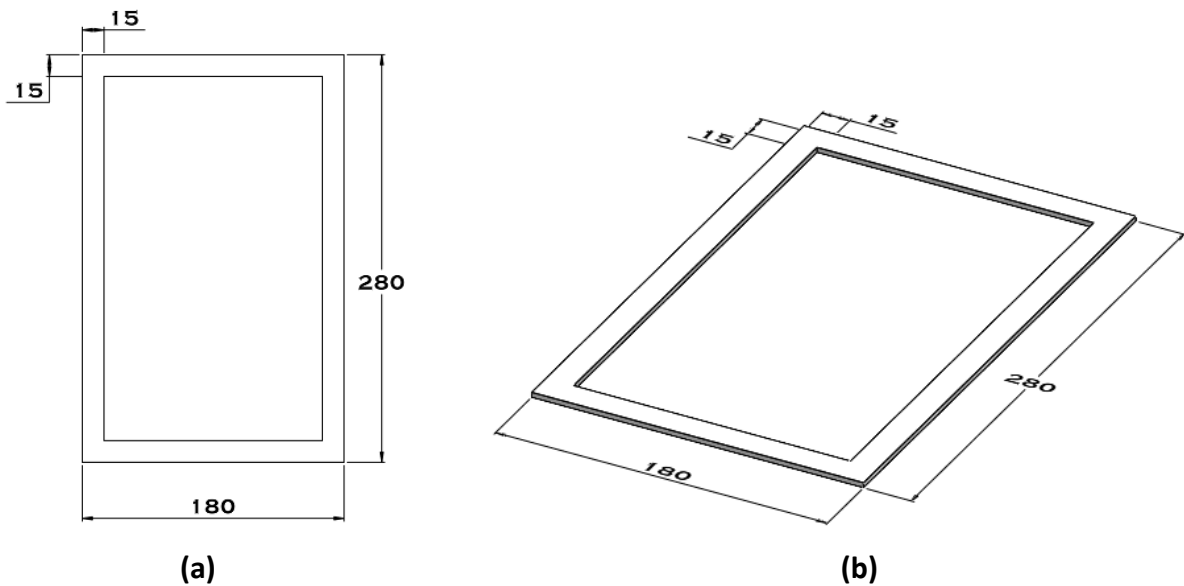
Dimensions of flexible sheet for boxes (a-isometric b-top view)
